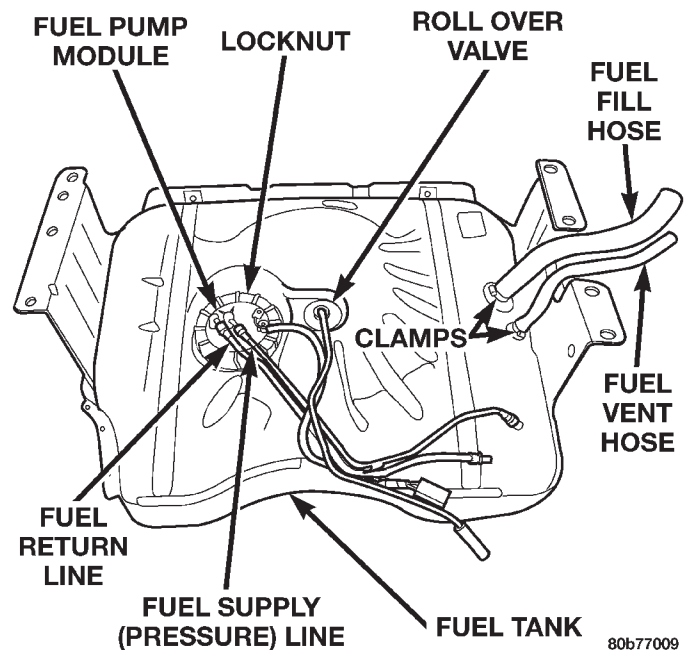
Fuel Tank/Fuel Pump Module Location (Top View)
